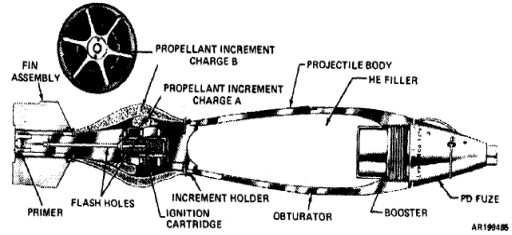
Shape of Cartridge, 81MM high-explosive KM000
